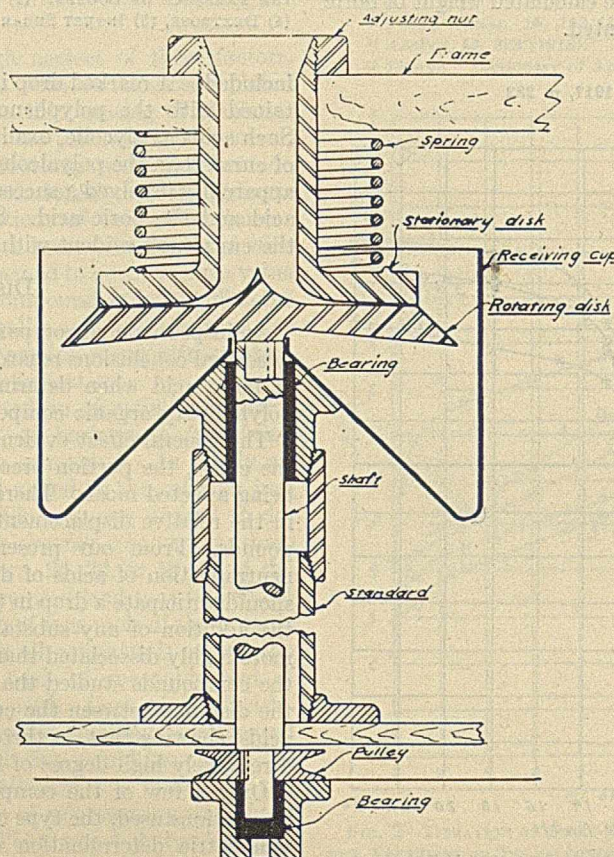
A CROSS SECTION OF THE MILL SHOWING DISKS, ADJUSTING MECHANISM, RECEIVING CUPS, AND DRIVING SHAFT
